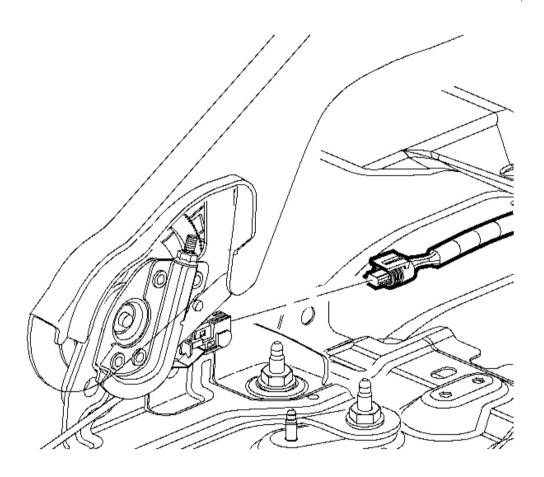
Disconnecting/Connecting Electrical Connector From Park Brake Warning Lamp Switch Courtesy of GENERAL MOTORS CORP.
